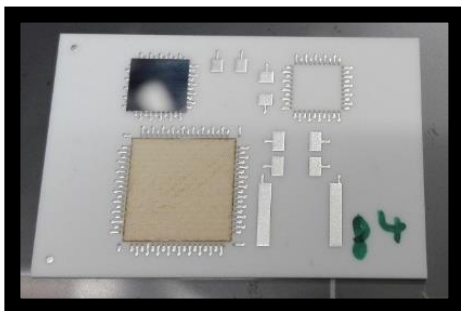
The printed sinter paste depots on the contact pads of a test ceramic board (appearing dark grey on the lighter AgPt-pads on the top right), a placed prepreg-material piece (bottom), and a placed chip (top left).
